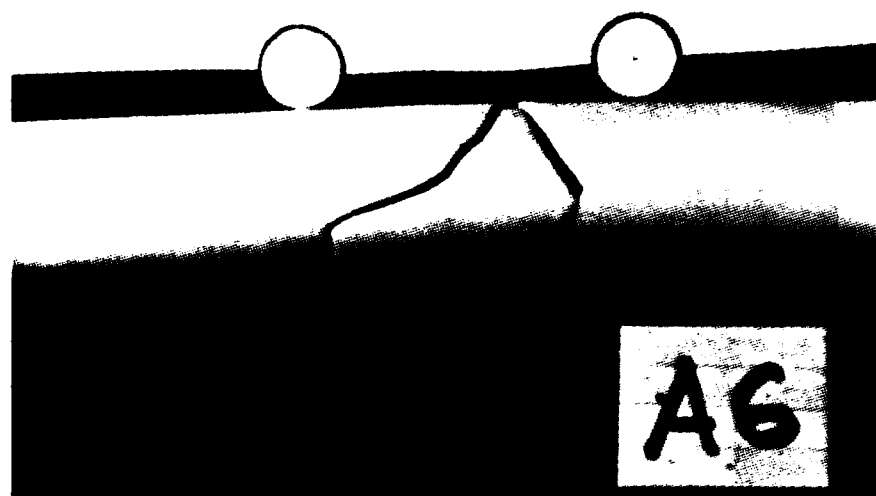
Multiple Tension Compound Fracture of Alumina Specimen A6
